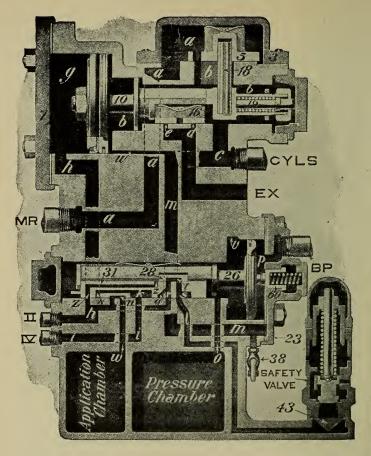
No. 6 Distributing Valve Automatic Service Position.
